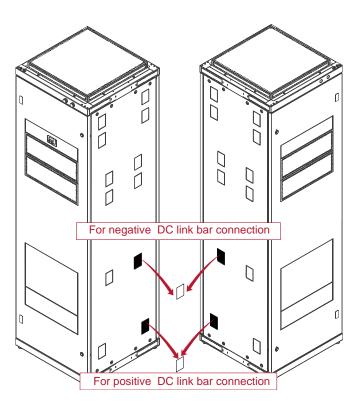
Remove Knockouts (Bottom Fed Cabinet)
